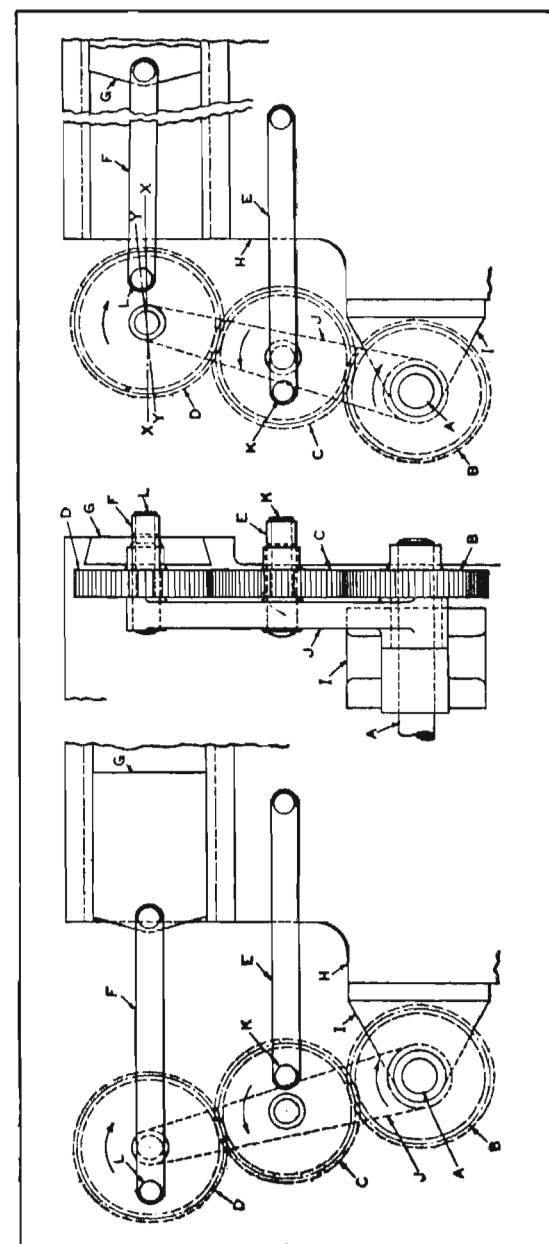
(Left) Diagrammatic View of Mechanism for Producing Variable Reciprocating Movement of Slide *G*. (Center) End View of Mechanism. (Right) View Showing Relative Positions of Gears and Slide *G* after One-half Revolution of Driving Gear *B*.
